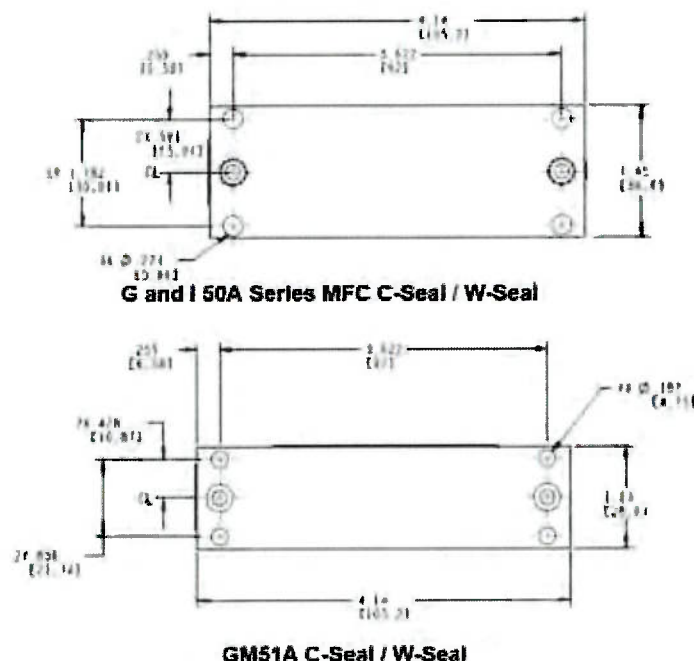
Mounting Bolt Holes Location for Non-Axial Gas Flow Compression Fittings
